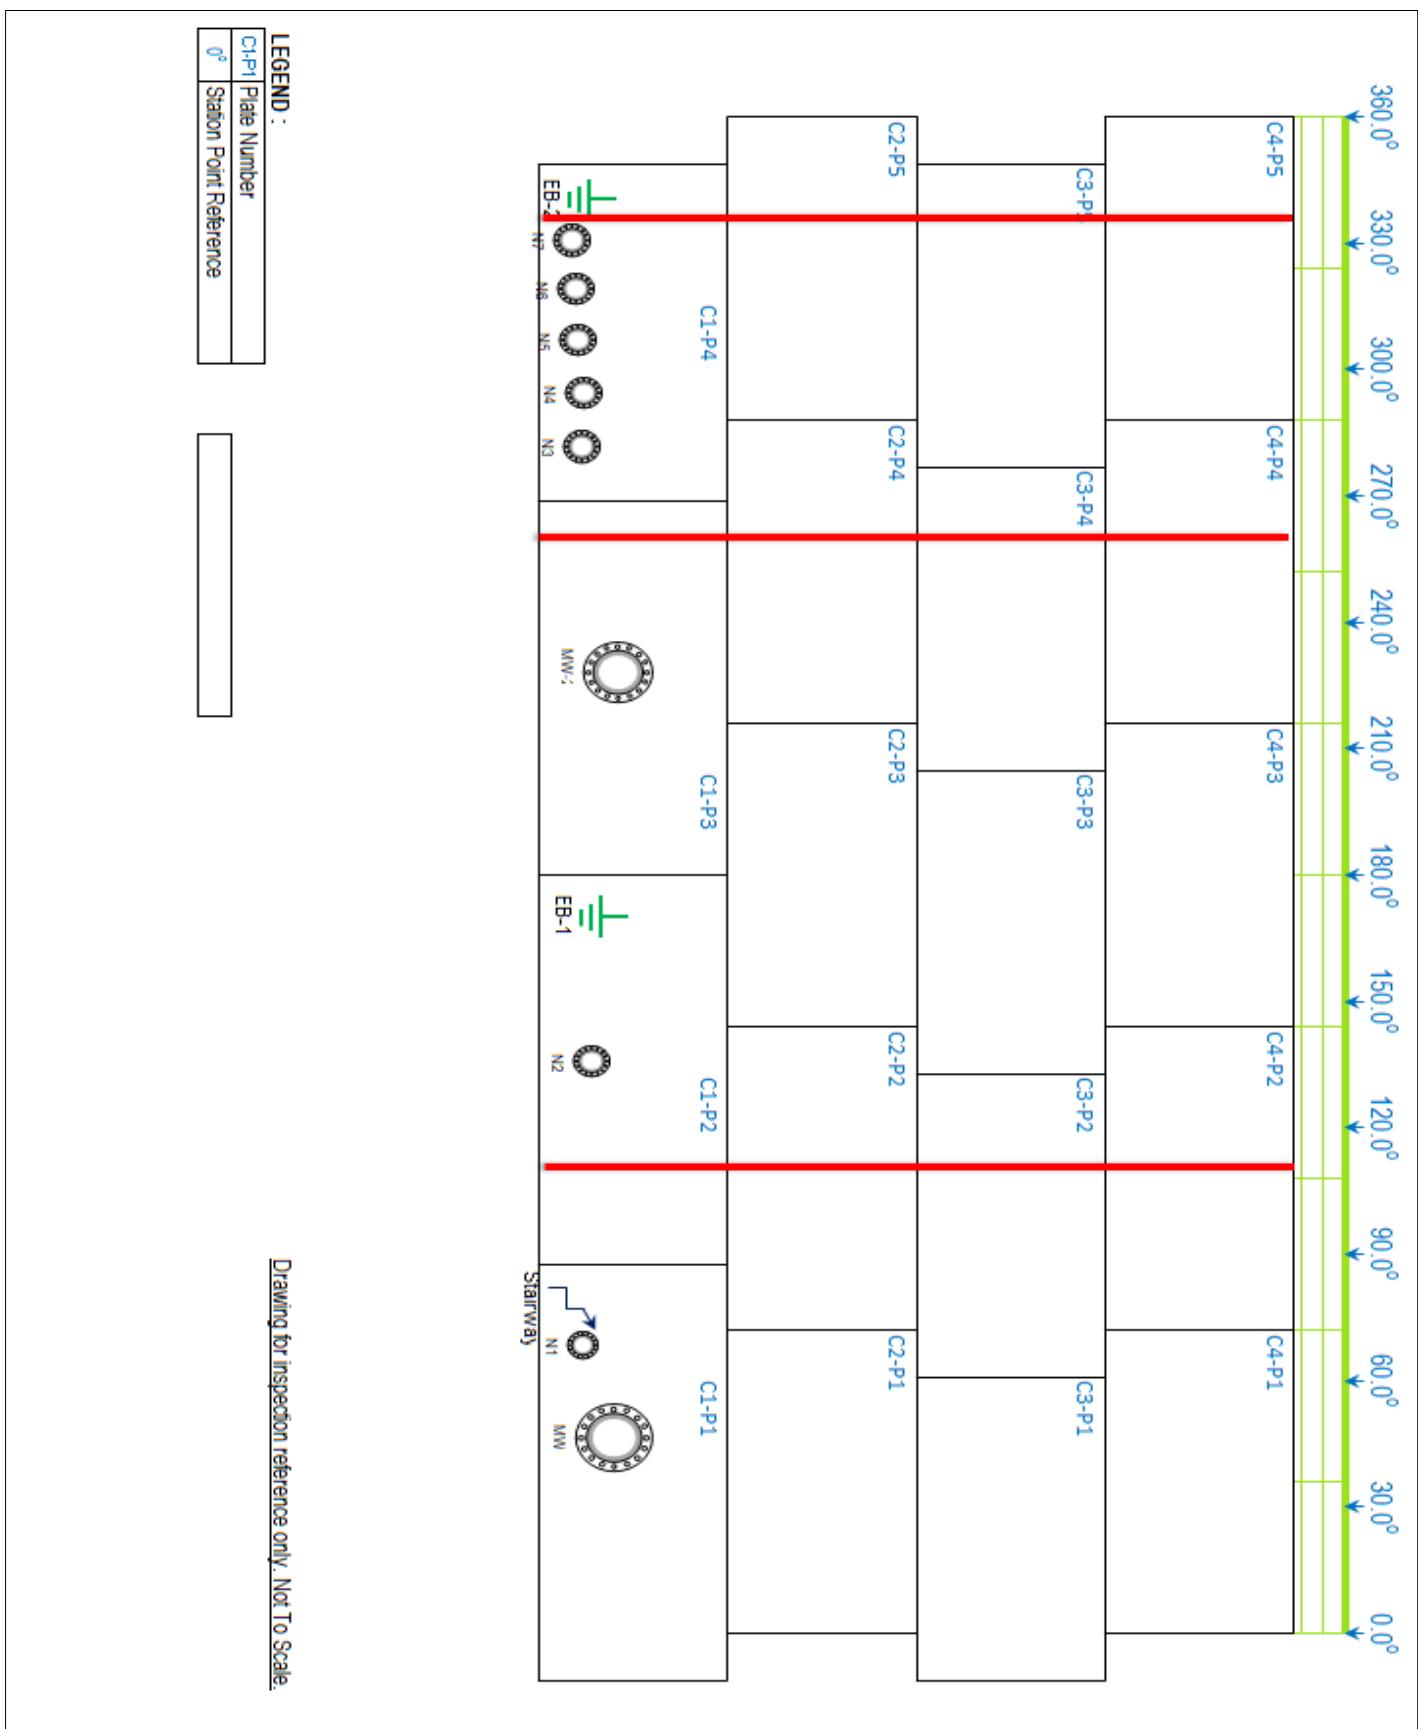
Tank Shell Plate and Nozzle Layout
